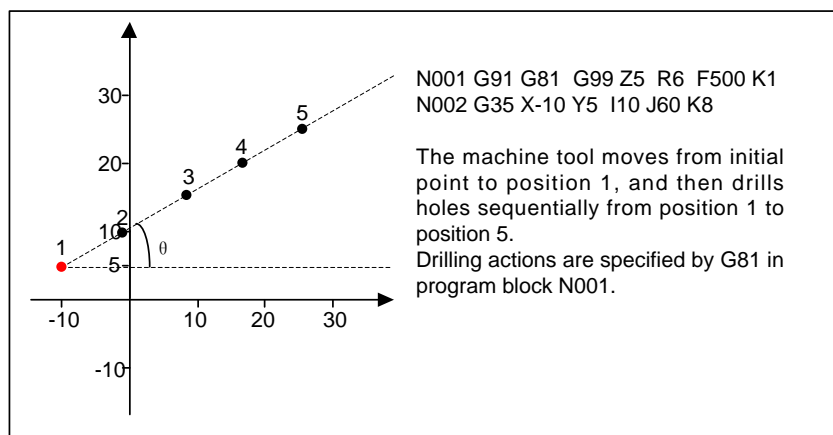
Sketch of Angular Straight Line Drilling Cycle
